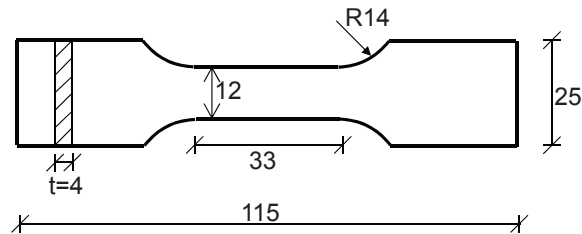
The geometry of the tensile test specimens. Measures are given in mm.
